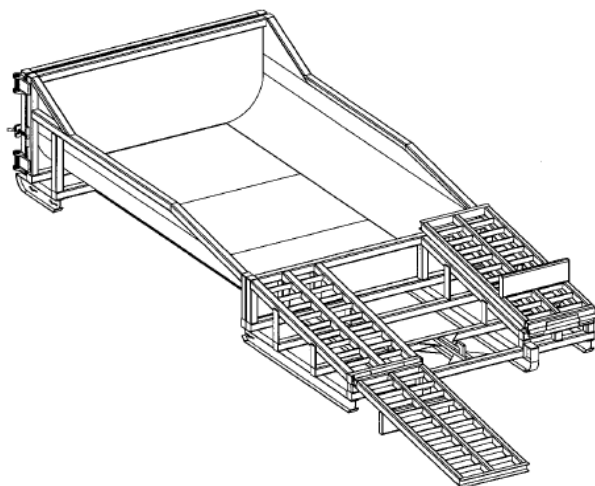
Prefabricated Concrete Washout Container w/Ramp
